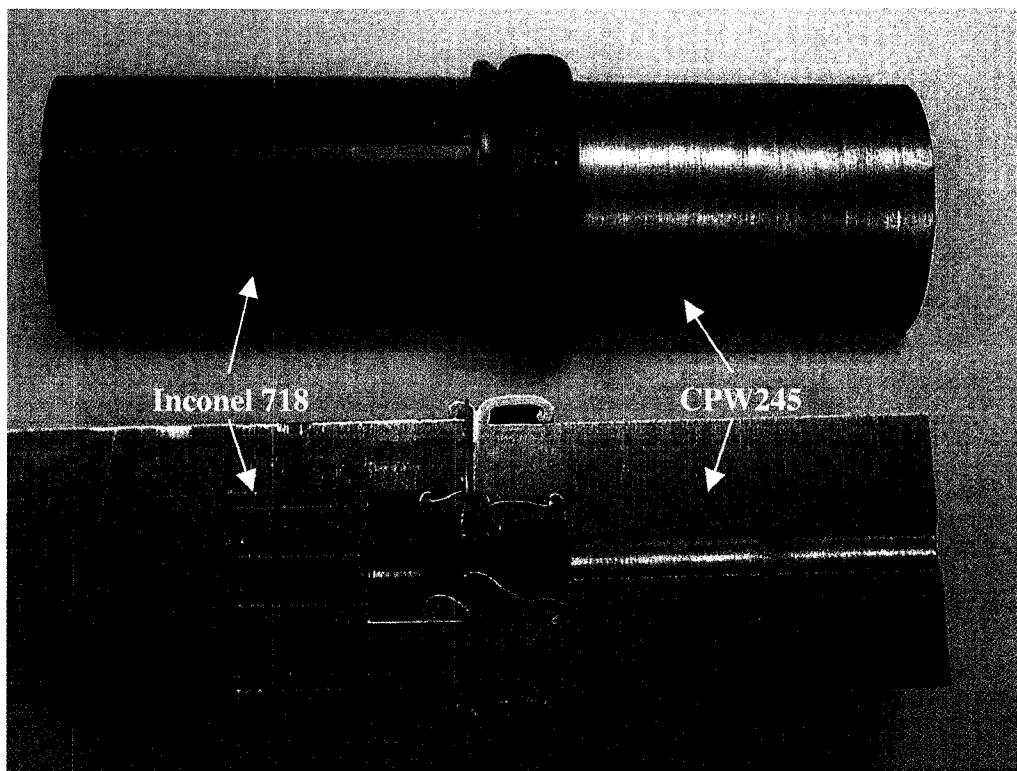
IW1 - First test pieces pair being friction welded (section cut)
